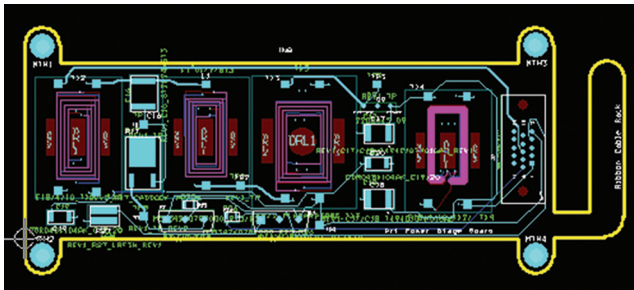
Layout view of Power Stage Block of the Goddard Converter
